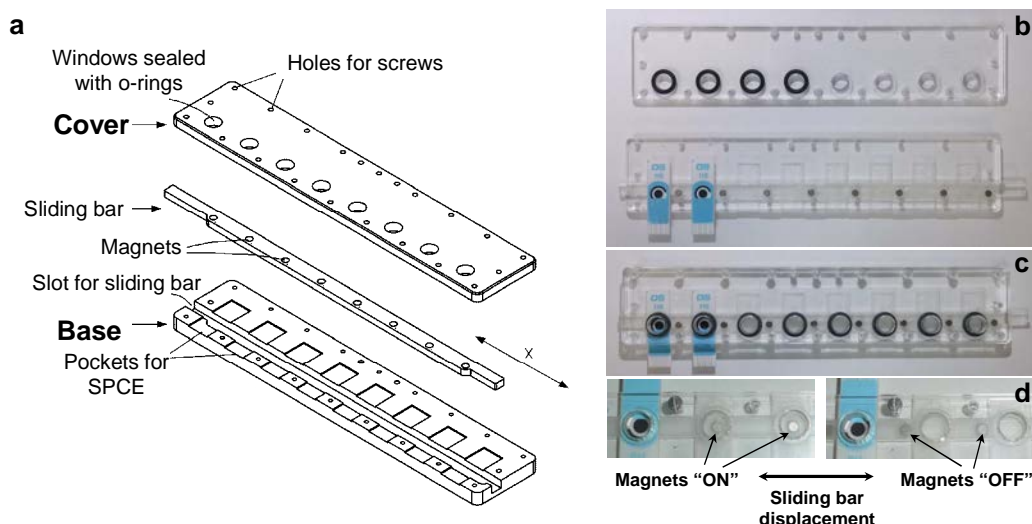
Customized magnetic holder for magneto-immunoassay electrochemical detection. (a) Holder components. (b–c) Holder prototype either (b) disassembled or (c) assembled. (d) Performance of the sliding magnetic bar.
